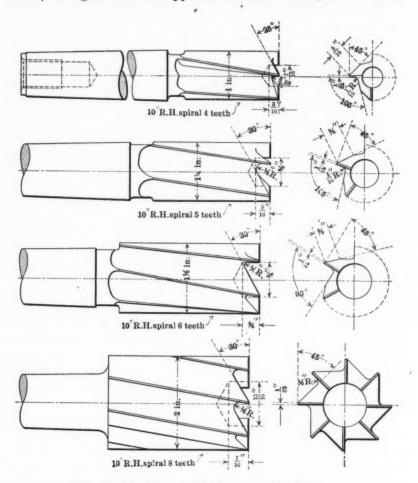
NEW TYPE OF TAPER SHANK END MILLS
